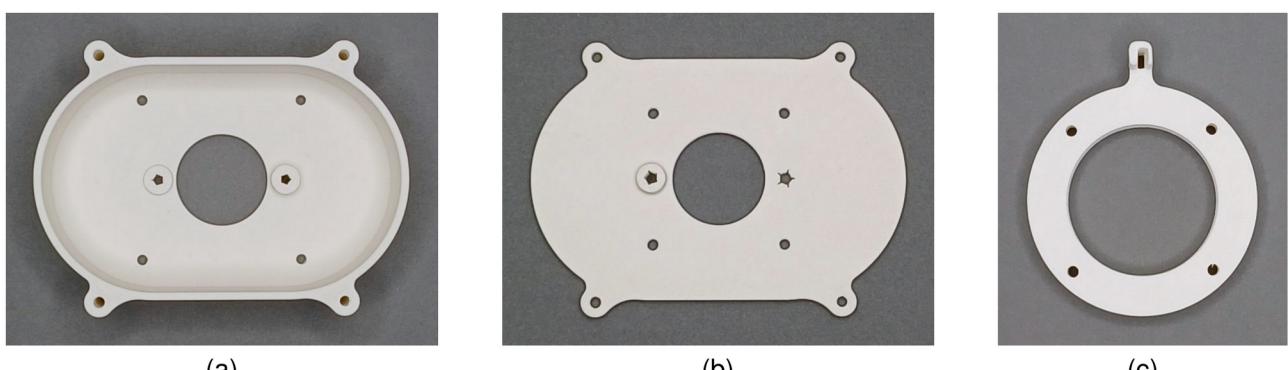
Housings. (a) Gearbox housing. (b) Gearbox top cover. (c) Bearing ring (Bearing housing).
